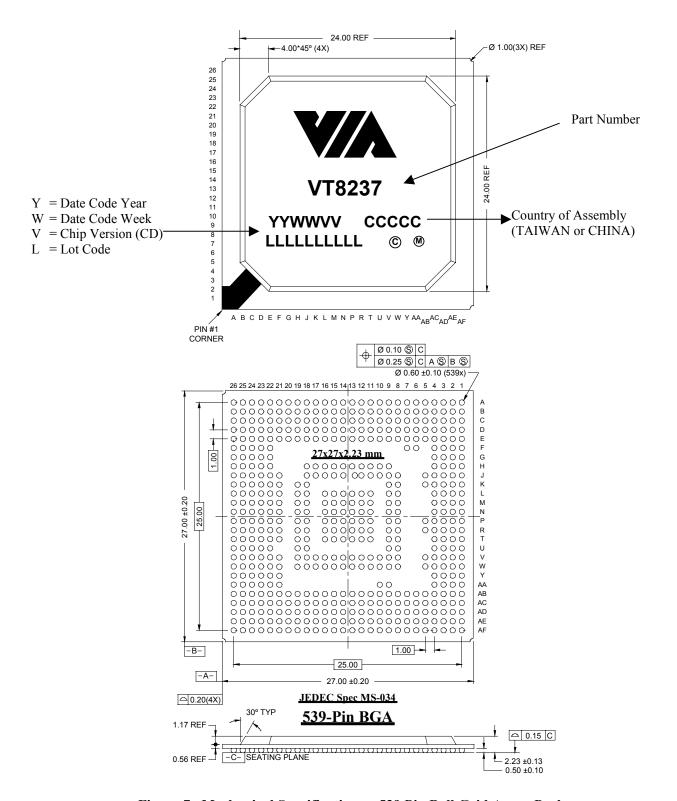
Mechanical Specifications – 539 Pin Ball Grid Array Package
